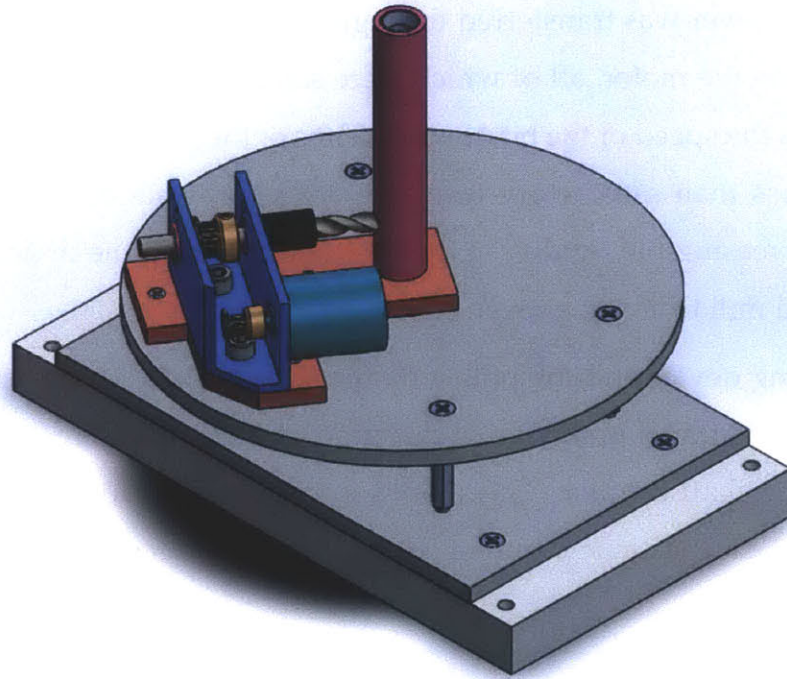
Final Solidworks design of shoulder cutting assembly.
